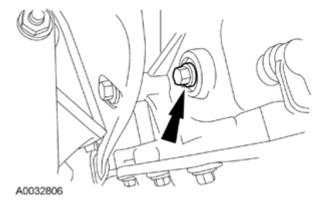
Locating Engine Plug Bolt Courtesy of FORD MOTOR CO.
